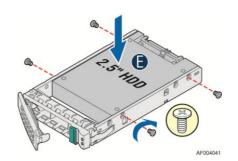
Installing Hard Disk Drive – Installing 2.5" HDD
